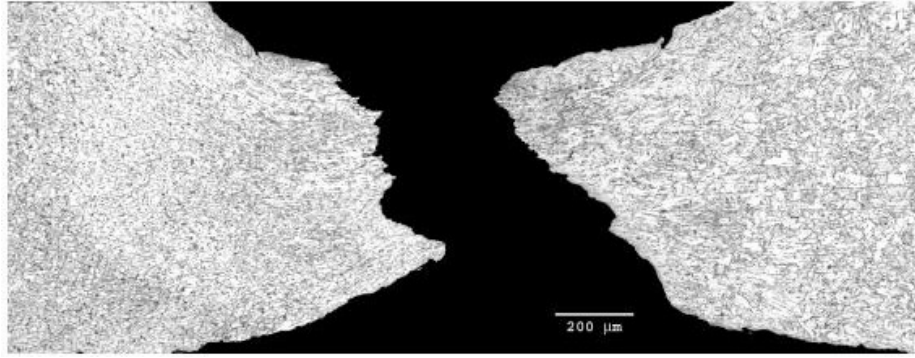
Metallographic cross section of tear #8-1. This sample contained a single repair weld surrounded by a region of recrystallized weld metal representing the original weld. Tearing occurred in either the recrystallized weld metal or the heat affected zone adjacent to the weld, and was accompanied by substantial localized plastic deformation.
